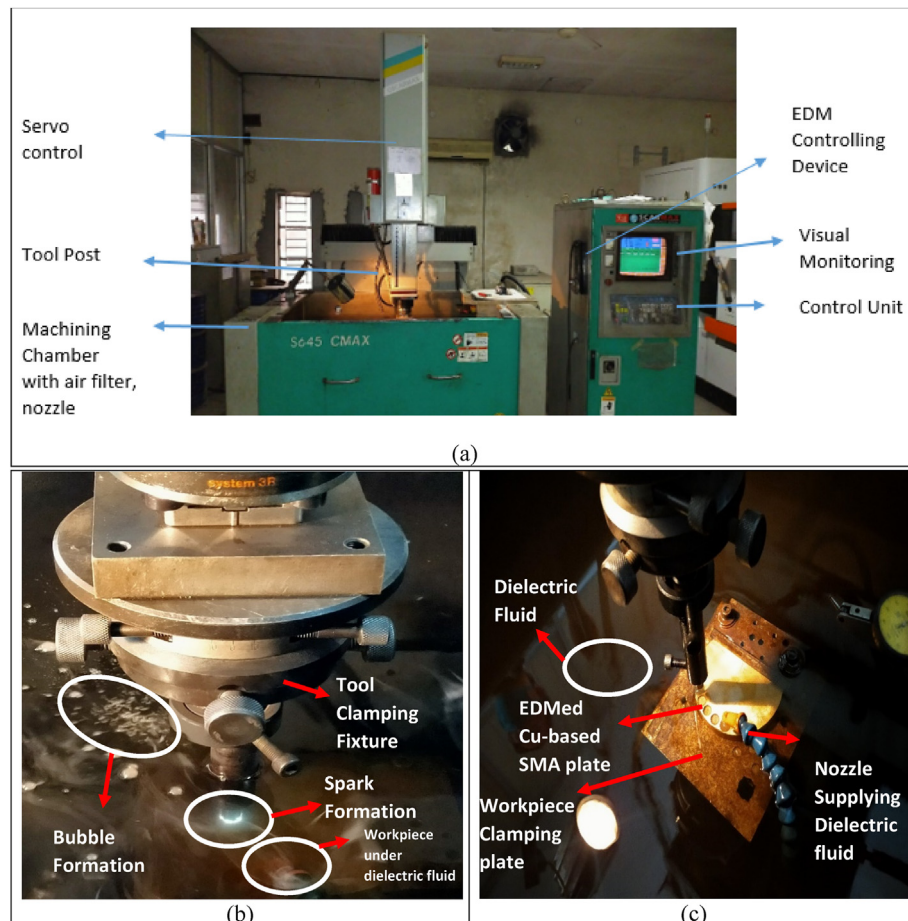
(a) Illustration of CNC EDM set-up (b) Enlarged view of machining zone (c) EDMed Cu-based SMA.
